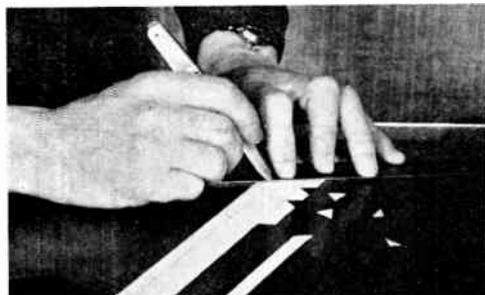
CONSTRUCTING THE TRANSFORMER BOBBINS.
